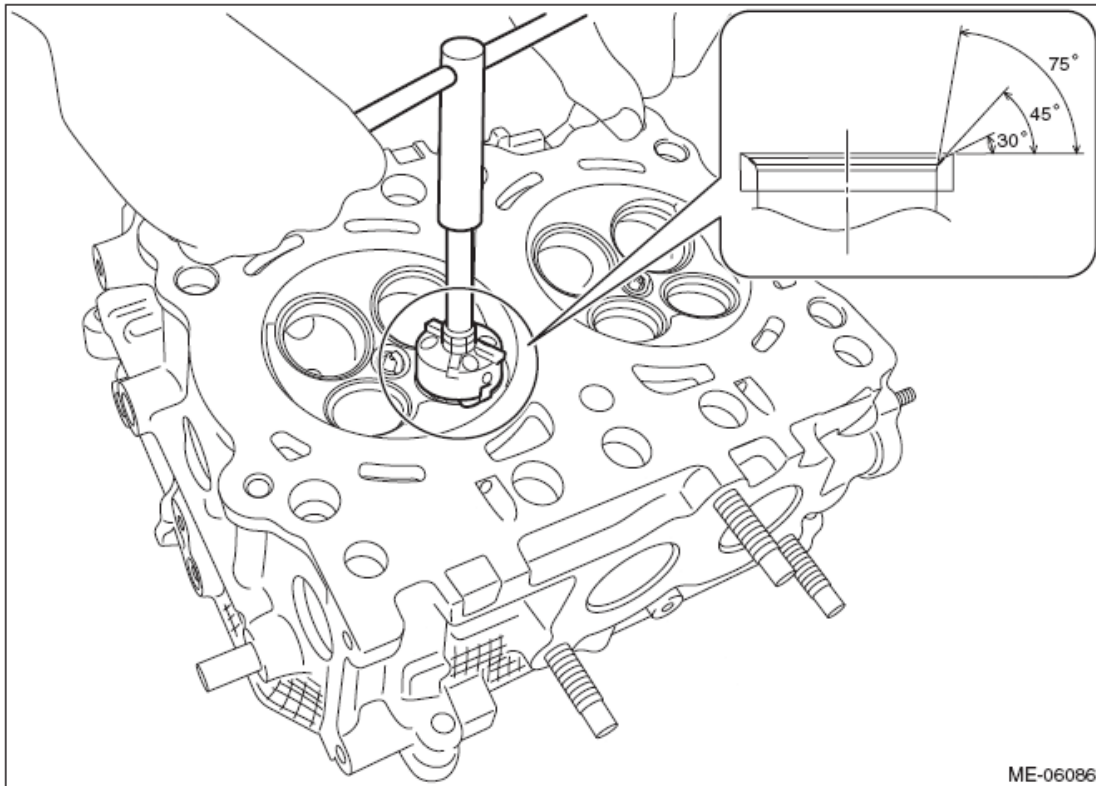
Checking Seating Angle Between Valve And Valve Seat
